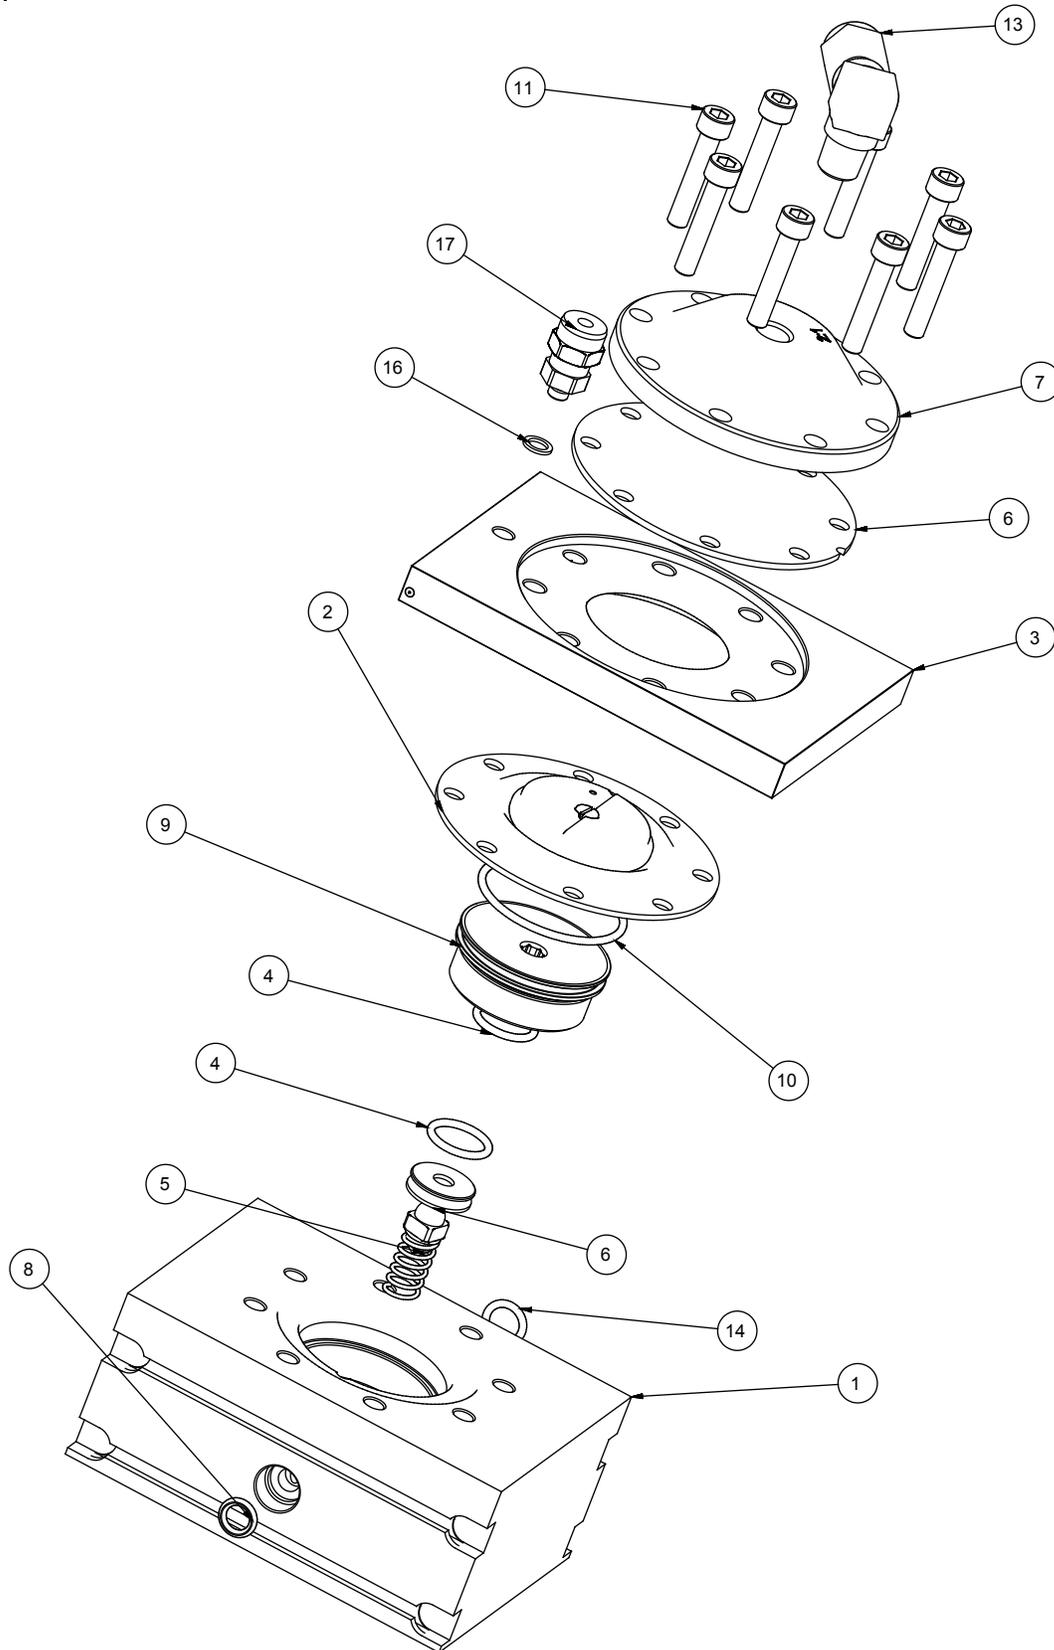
79239-XX Regulator Disassembly / Reassembly
